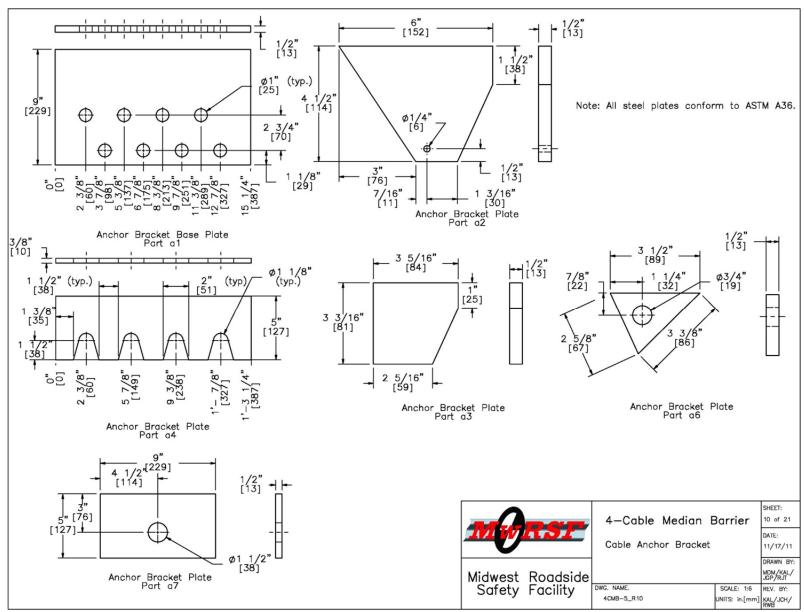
Anchor Bracket Details, Test No. 4CMB-5
